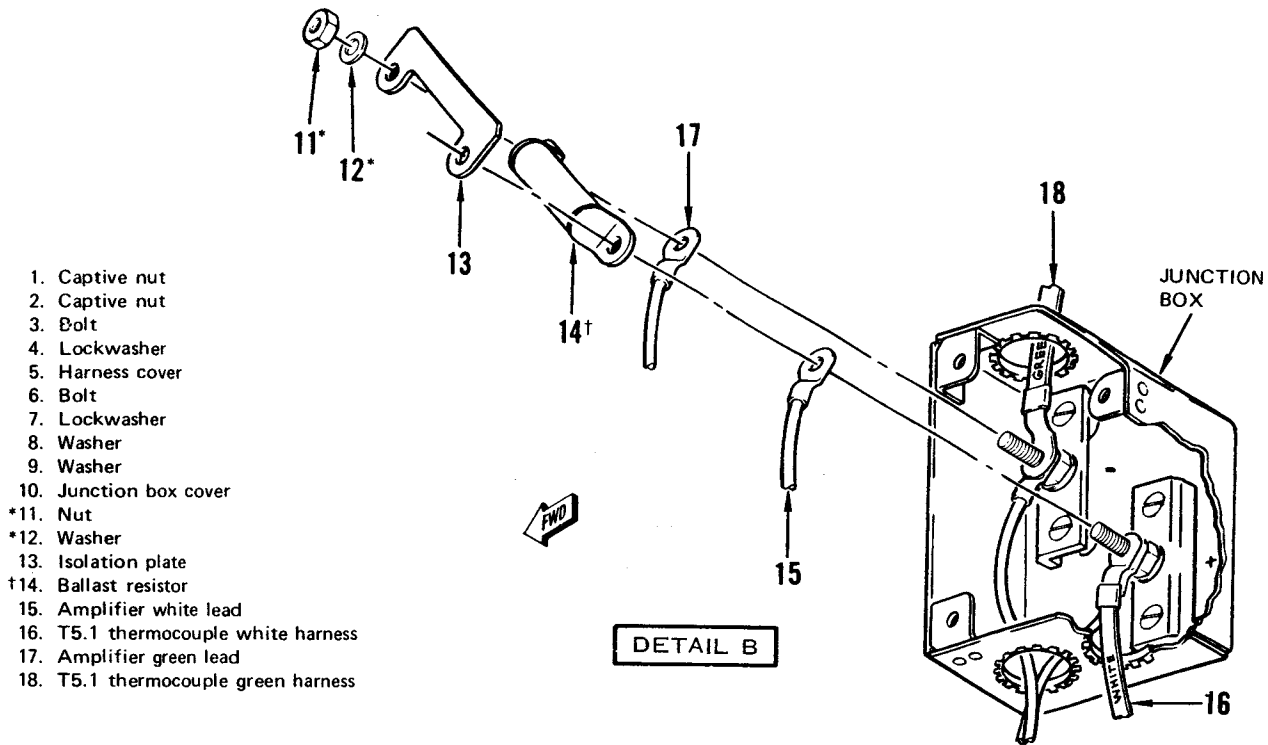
Removal and Installation; T5.1 Thermocouple Harness (Sheet 1 of 2)
